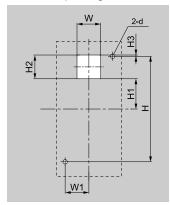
Panel Cut-Out Dimensions to Attach Outside of Control Panel
